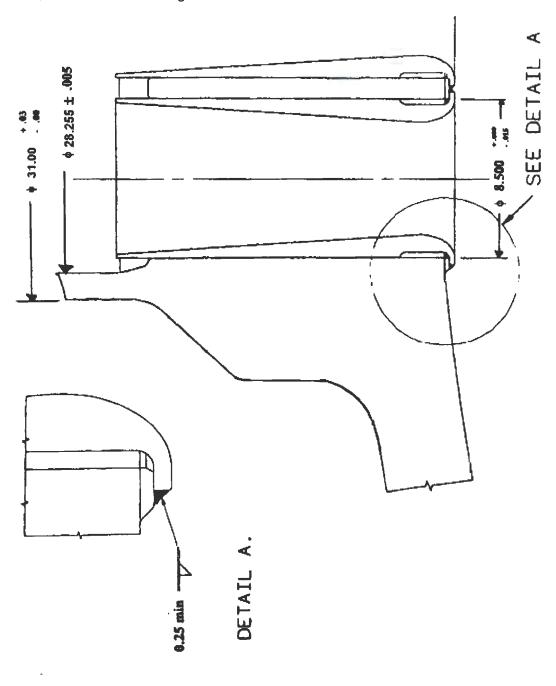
Steam Outlet Nozzle and Venturi Insert Assembly Details
